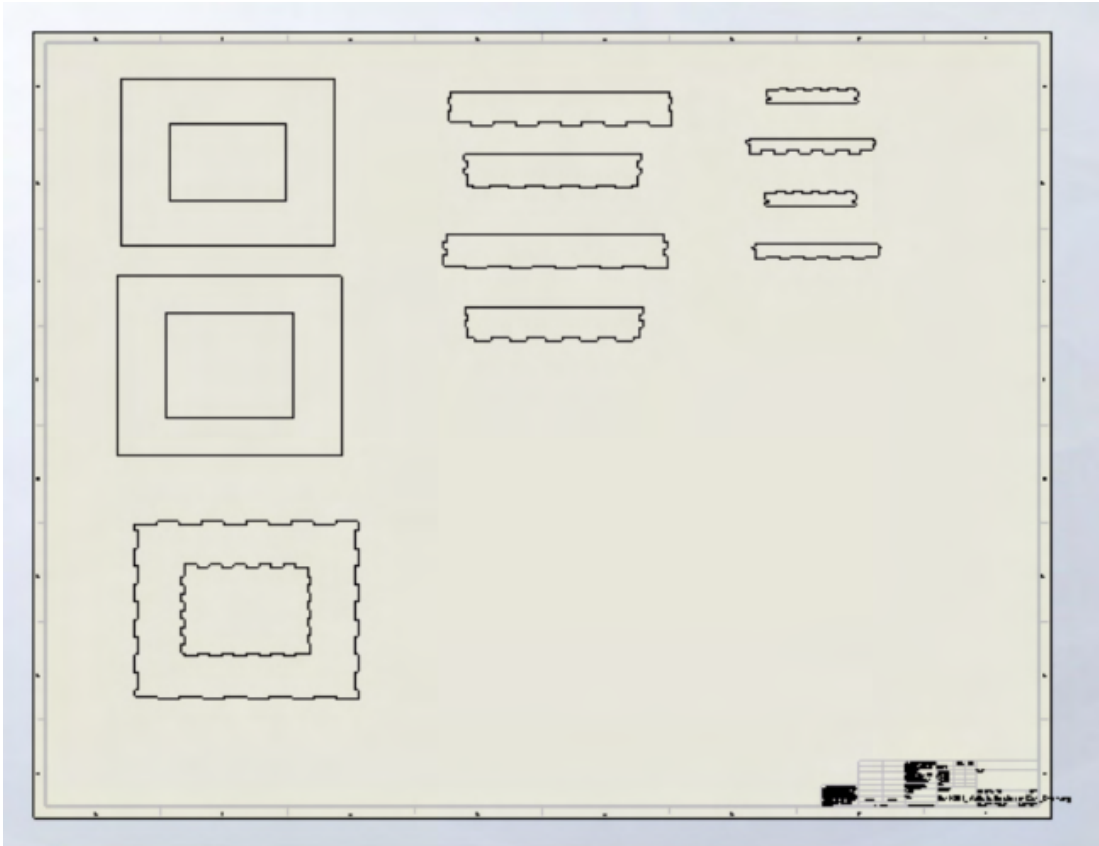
SOLIDWORKS drawing that was converted to ADOBE Illustrator files in order to be printed on the laser cutter
